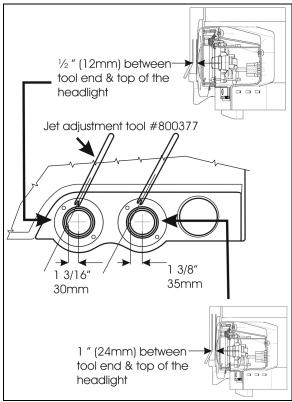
WASHER NOZZLES ADJUSTMENT
